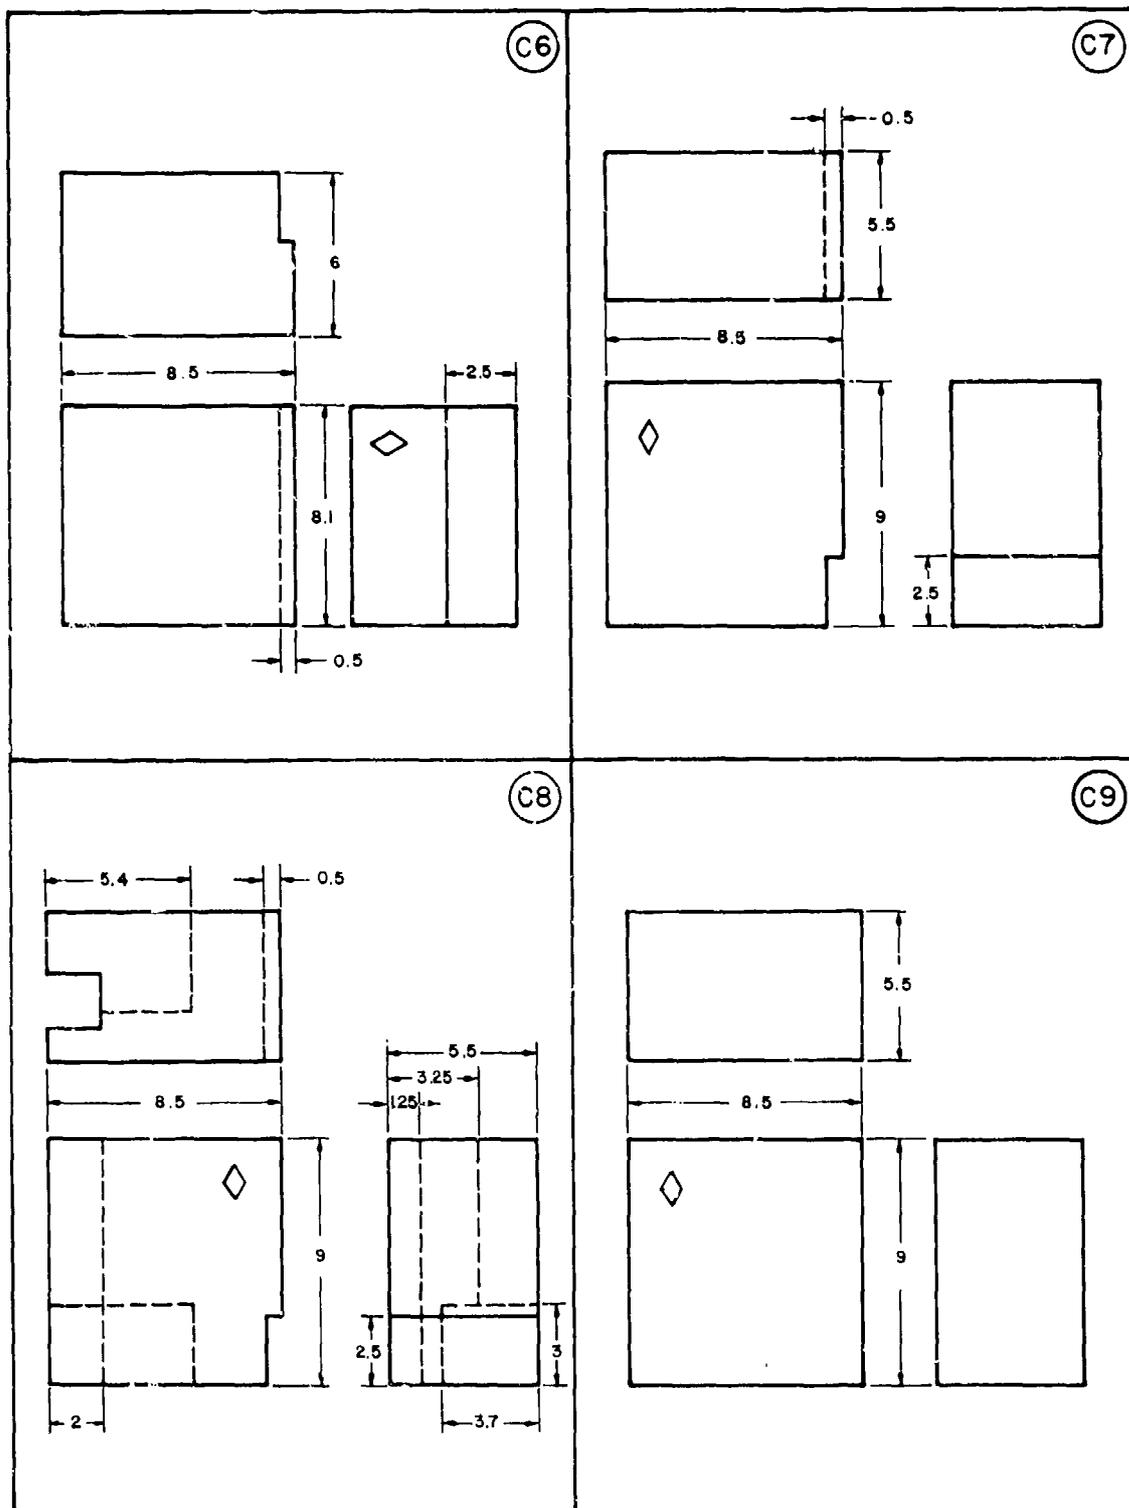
Batt Details, CF-104 Ammunition Compartment Tank
